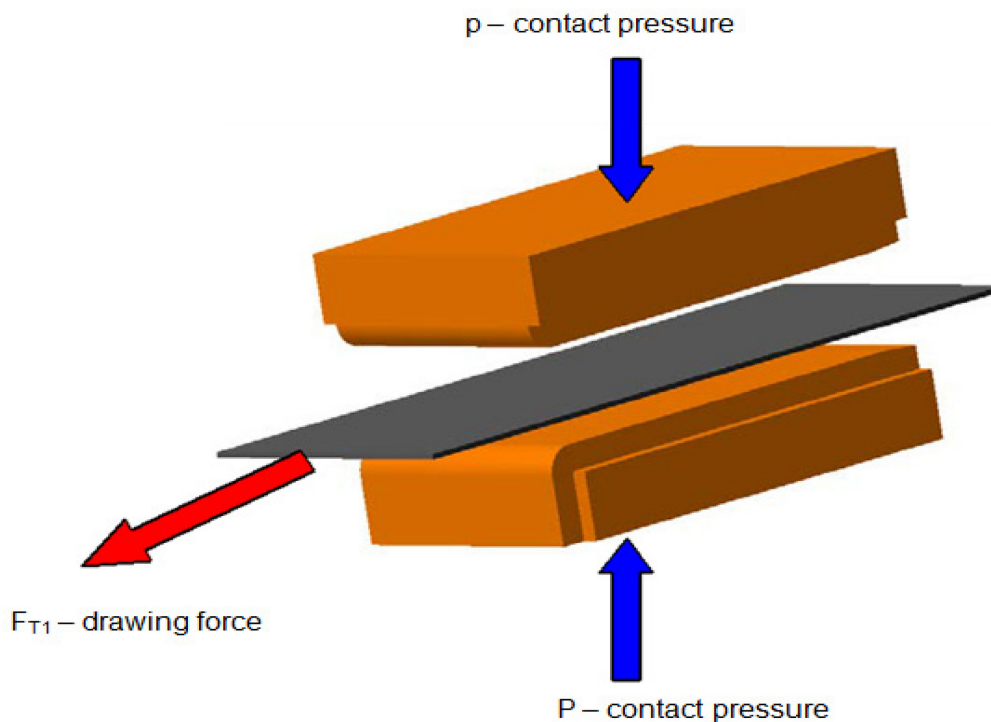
Strip drawing test - simulation in the blank holder area
